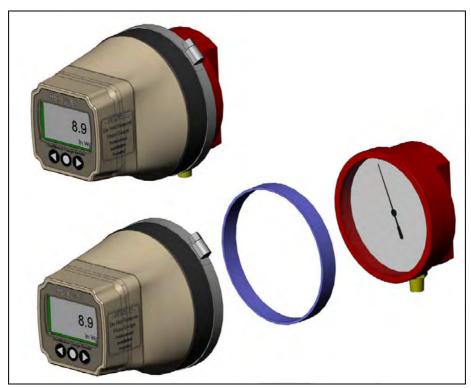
Assembly of WGR with Shim Band onto Free-Standing Gauge
